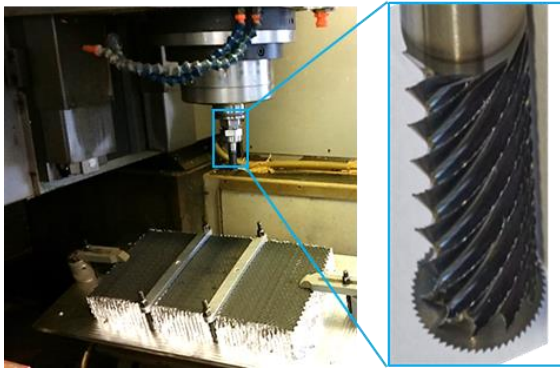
Grooving operation of aluminum honeycomb. (Workpiece size 400mm x 250mm)
